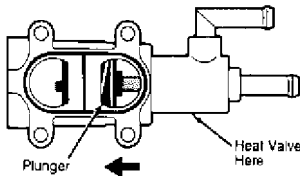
Cross-Sectional View Of Air Valve (Miata, Protege & 323)
